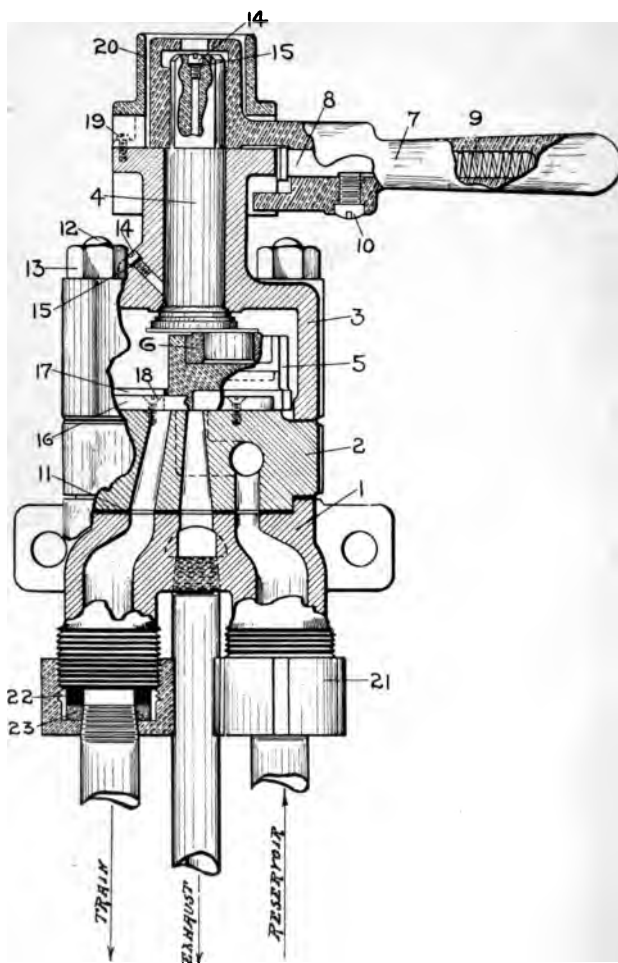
Sectional Diagram of Motorman's Valve and Handle.
